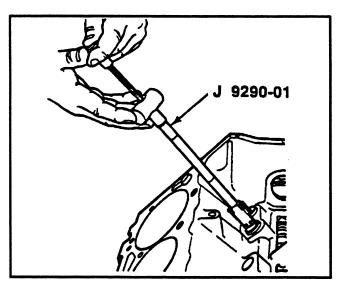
REMOVAL TOOL FOR HYDRAULIC LIFTER
